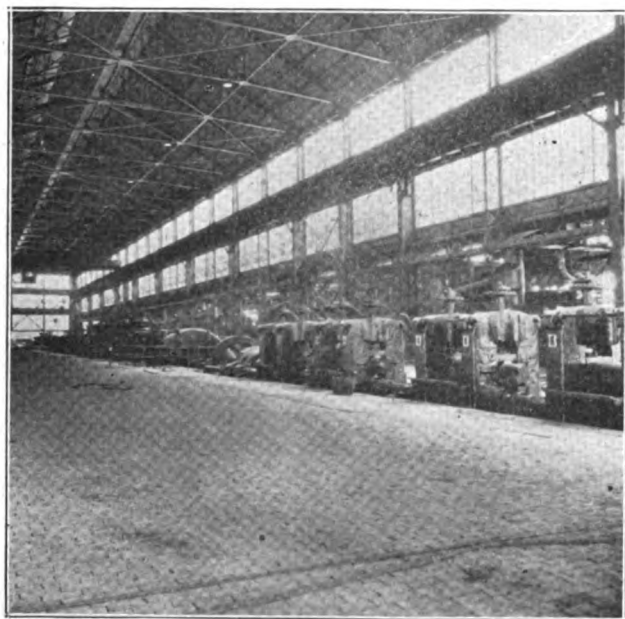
General view of sheet and pair furnaces, charging side—in bar storage building.
